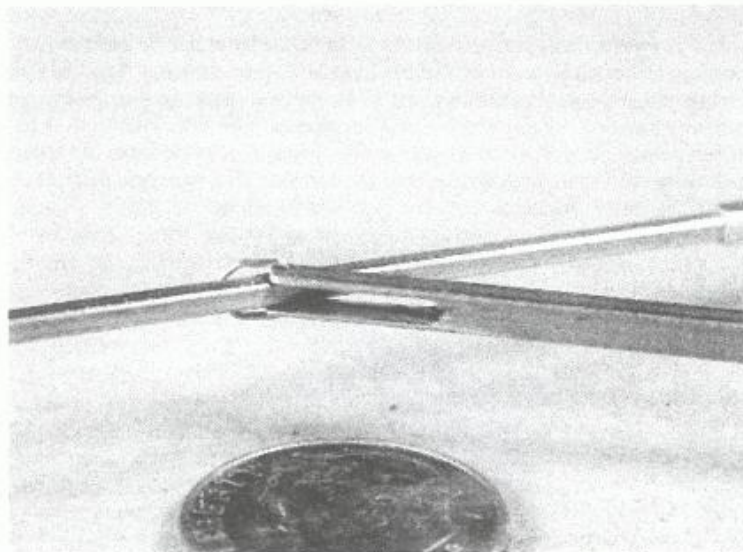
Here is a photograph of a completed measuring tool, with a good view of the slot in the handle piece and how the basic parts of the tool are assembled.
